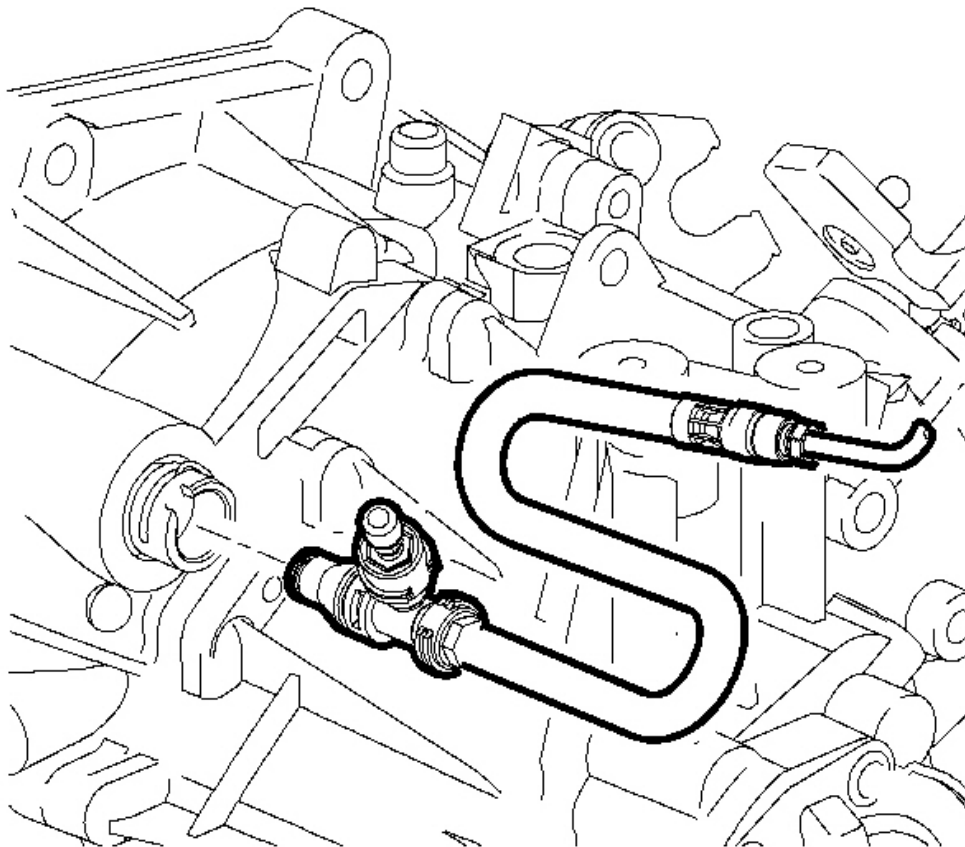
Disconnecting/Connecting Clutch Hydraulic Line
